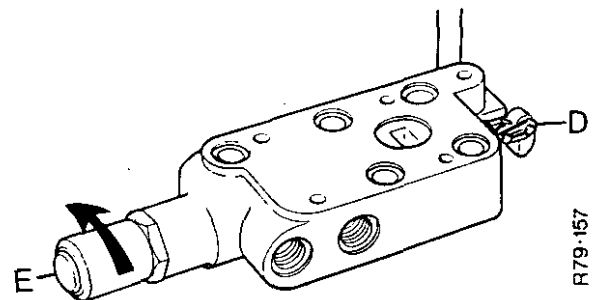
DISASSEMBLY OF THE LIVE TAKE-OFF VALVE
